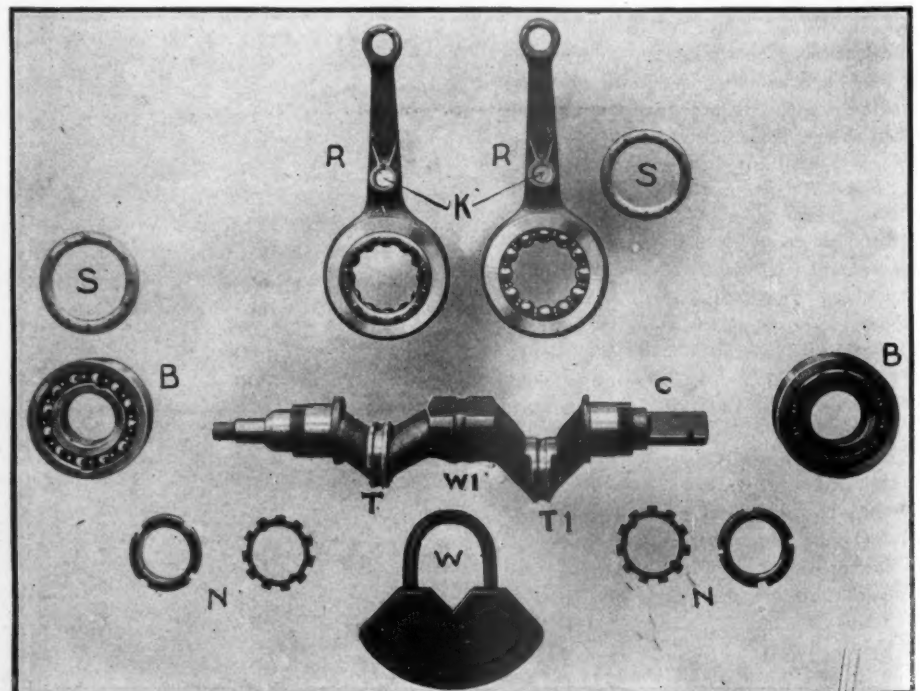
MOTOR ASSEMBLY IN WHITE ENGINE
